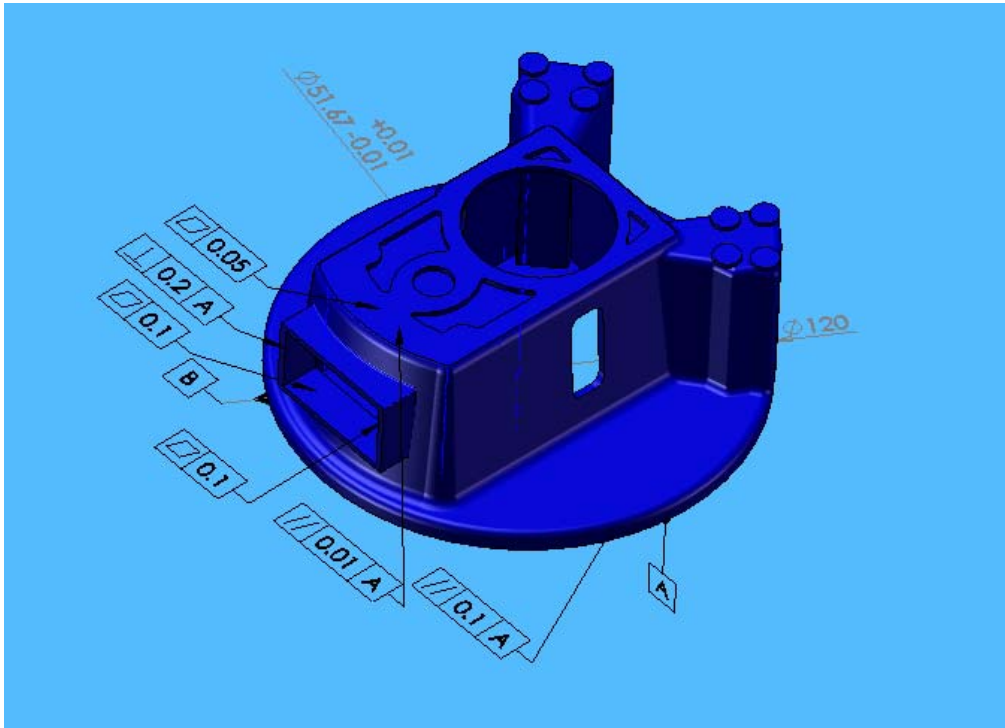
Tolerances and dimensions for the clutch housing
